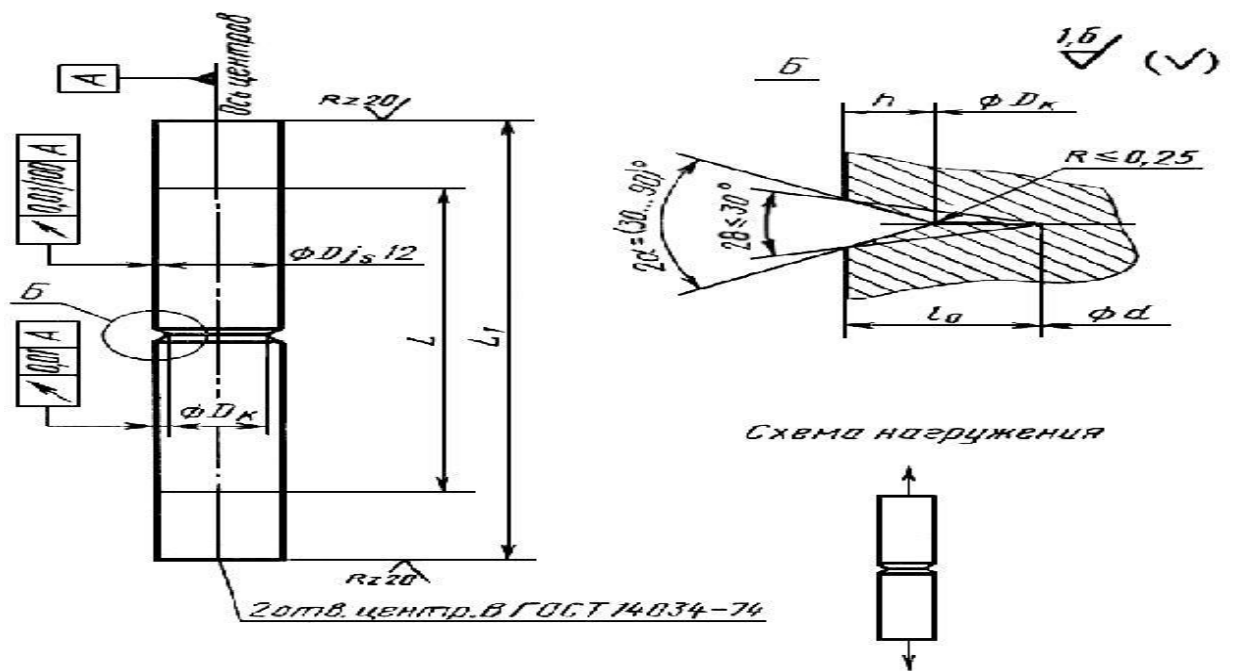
Scheme of loading of specimens when testing crack resistance of the surface
